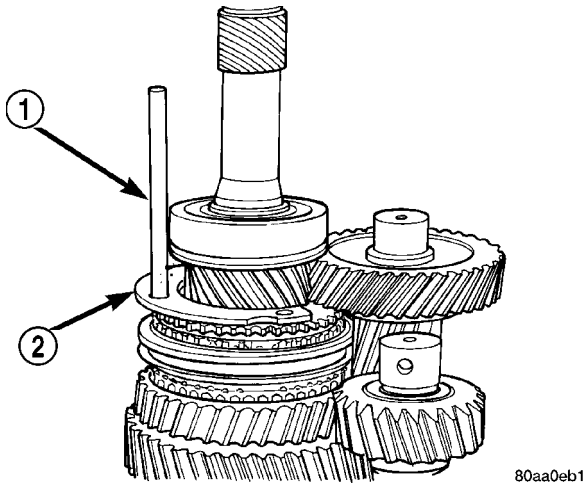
POSITIONING OUTPUT SHAFT BEARING
